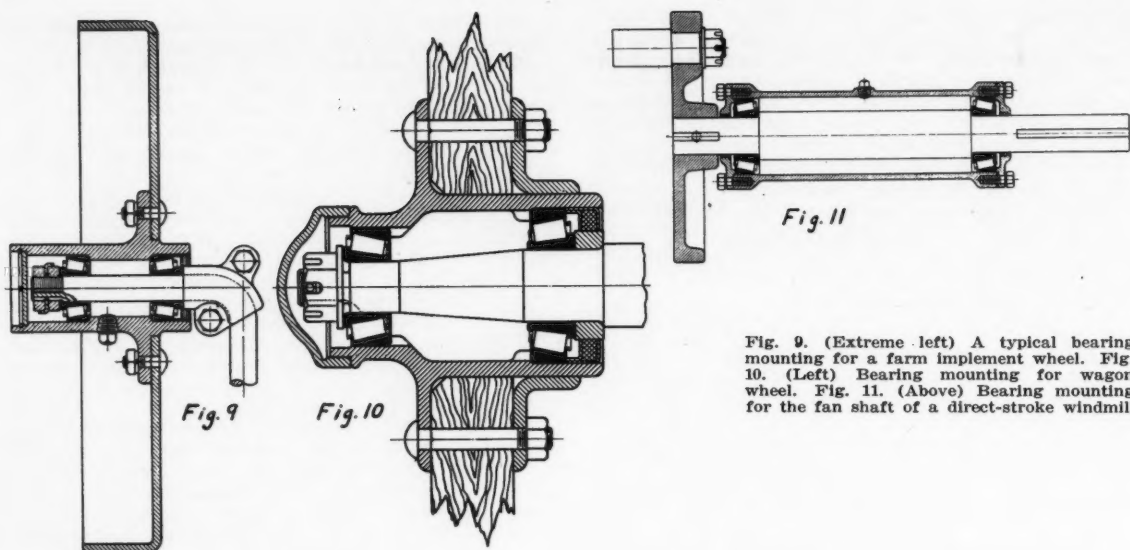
(Extreme left) A typical bearing mounting for a farm implement wheel. Fig. 10. (Left) Bearing mounting for wagon wheel. Fig. 11. (Above) Bearing mounting for the fan shaft of a direct-stroke windmill
